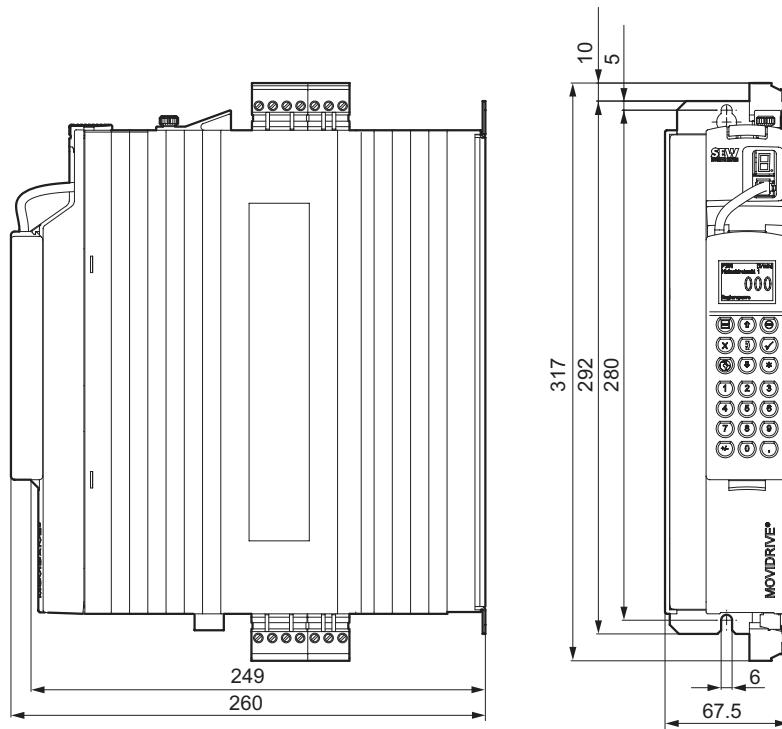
Dimension drawing for MDX60B size 0S with braking resistor, dimensions in mm
